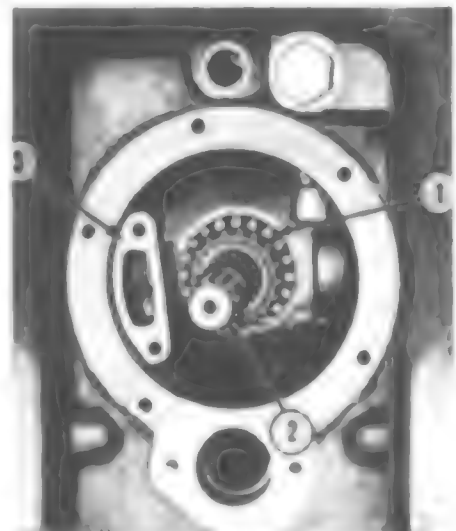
Front view of hydrostatic housing with charge pump removed.
